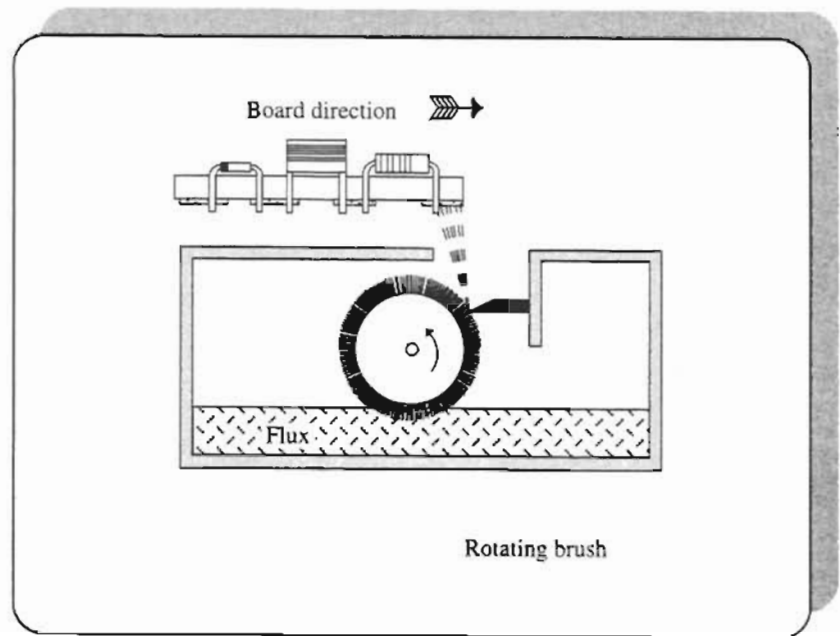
Bristle spray fluxing, using a rotating brush — a knife edge catches on a brush to flick the flux onto the base of the assembly
